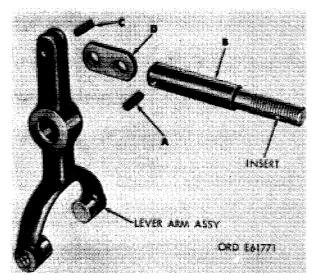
Disassembling or assembling shaft and lever assembly.
